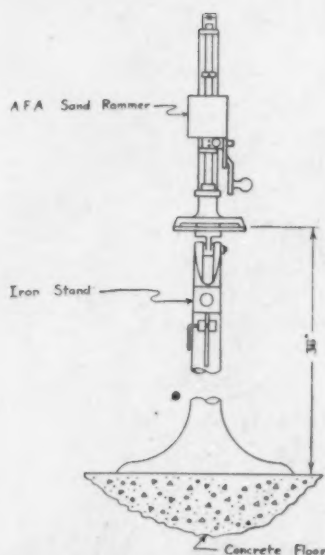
A.F.A. SAND RAMMER MOUNTED ON IRON STAND, 1ST OPERATOR.
